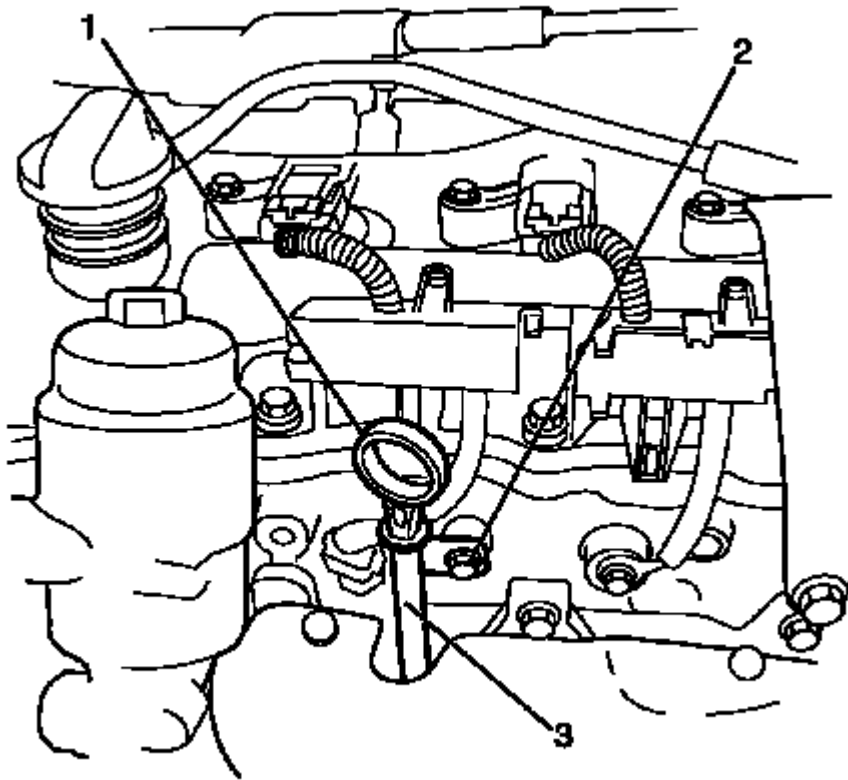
Identifying Oil Level Indicator Tube & O-Ring
